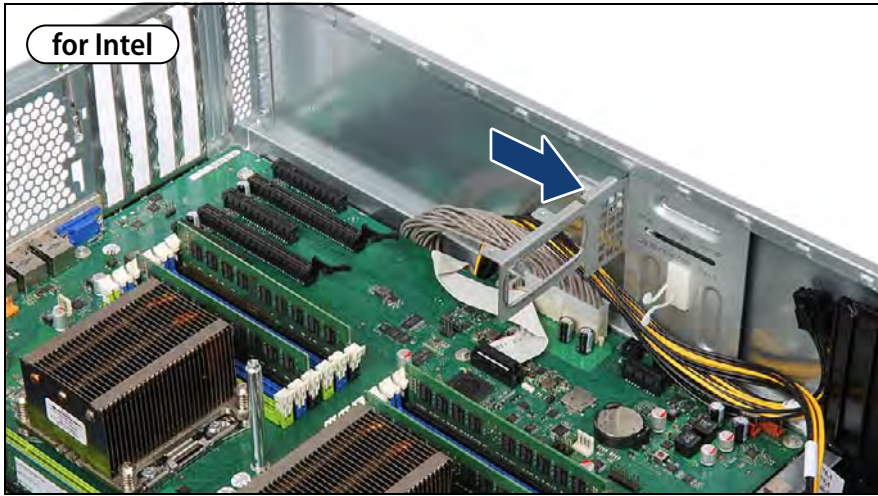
Installing the coprocessor card mounting bracket (Intel) (C)
